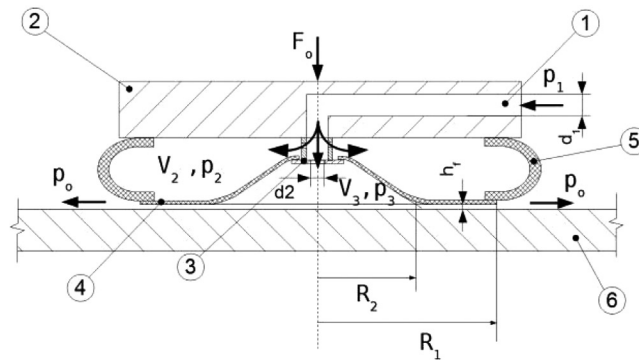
View of the pneumatic cushion in cross section: 1 – supply collector, 2 – carrying plate, 3 – outlet nozzle, 4 – the bearing surface of the air chamber, 5 – the side surface of the air chamber, 6 – rigid surface
